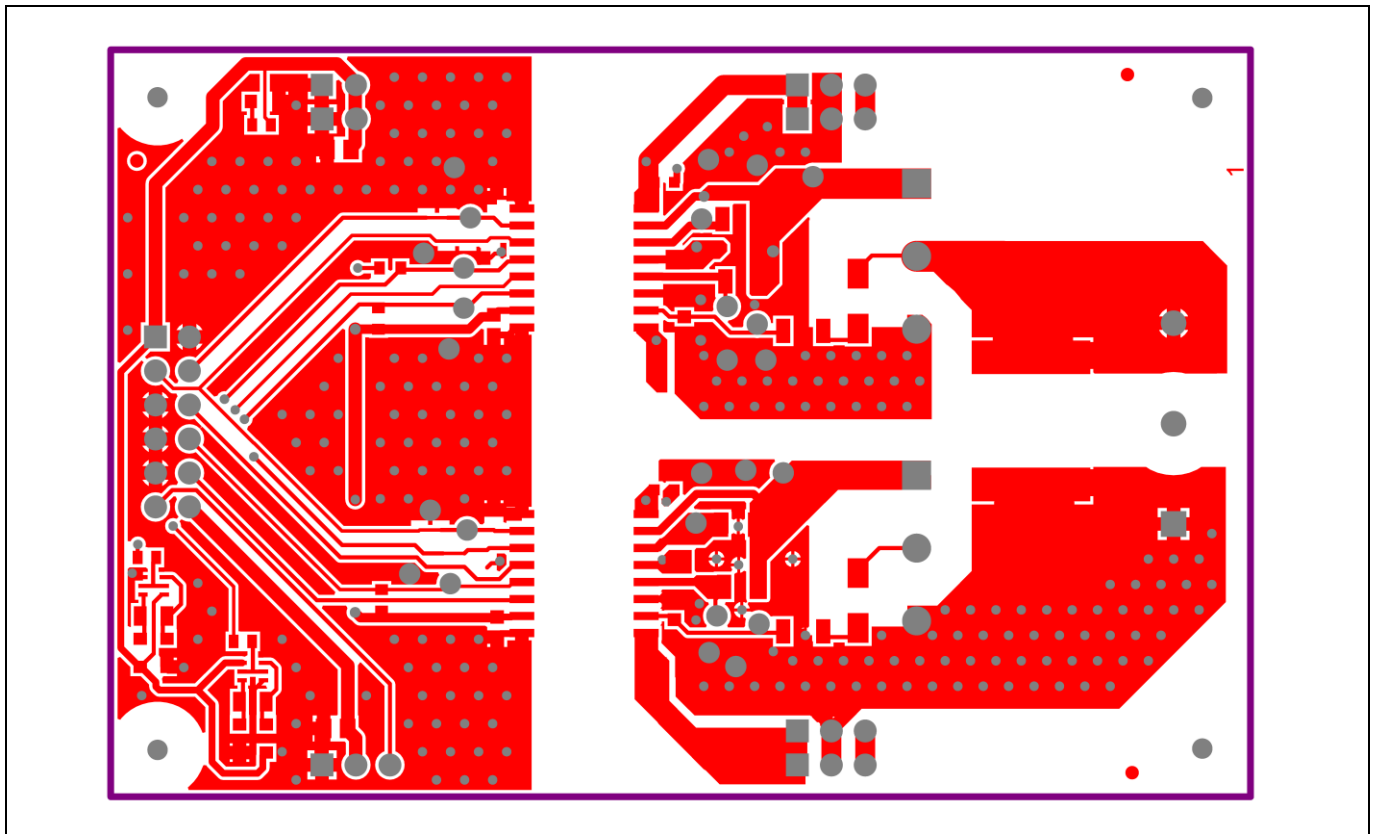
Eval-1ED3321MC12N – PCB top layer view
